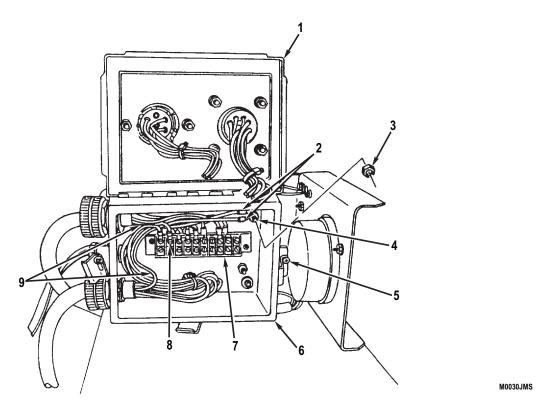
Rear Dolly Taillight Assembly Cable Assembly Internal Connection.
